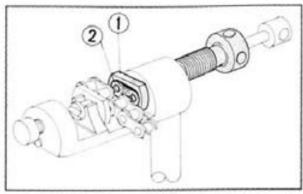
(i) Pressure holder (ii) Joint plate
